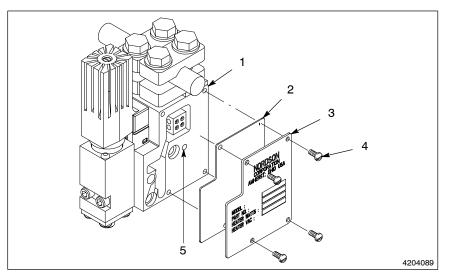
Removing or Installing the Manifold Cover Plates, Insulators, and RTD
